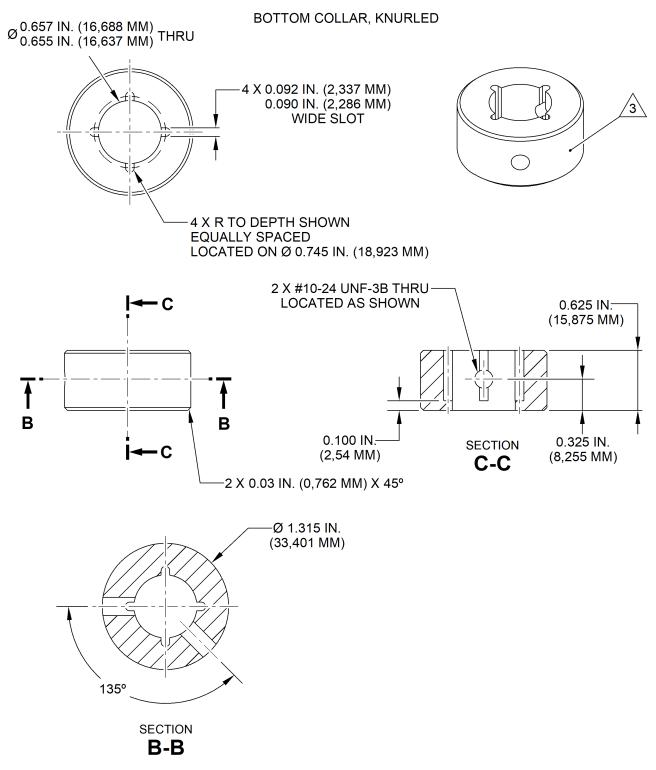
Dampener Plate Gauge (P/N 19-601076) (Sheet 3 of 4)
